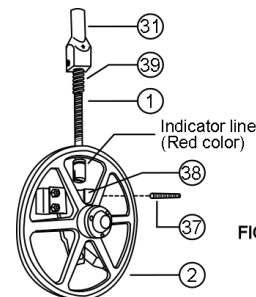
ASSEMBLY OF UPPER WHEEL AND TENSION GUIDE
